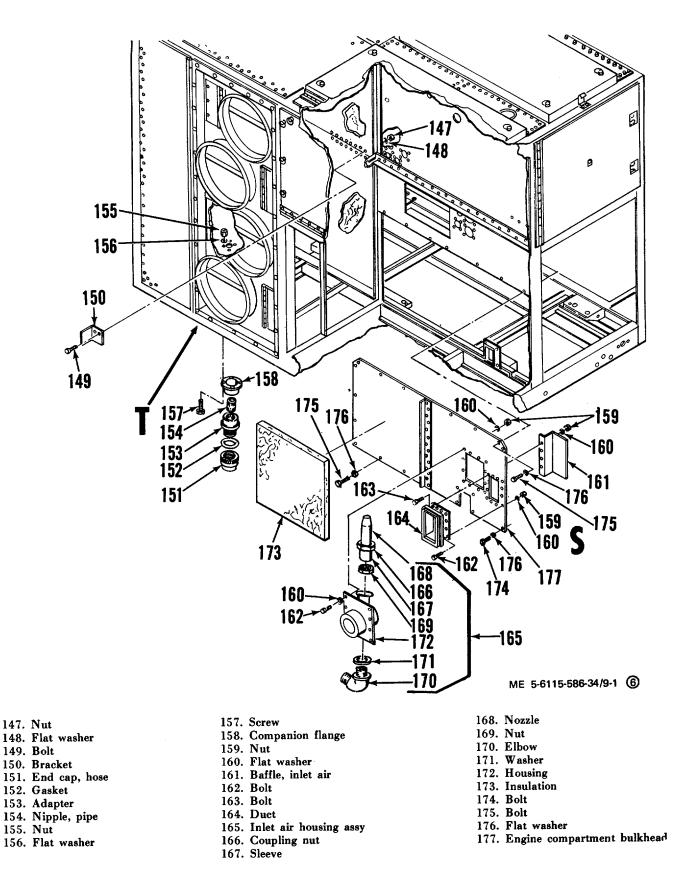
Enclosure assembly, exploded view. (sheet 6 of 10)
